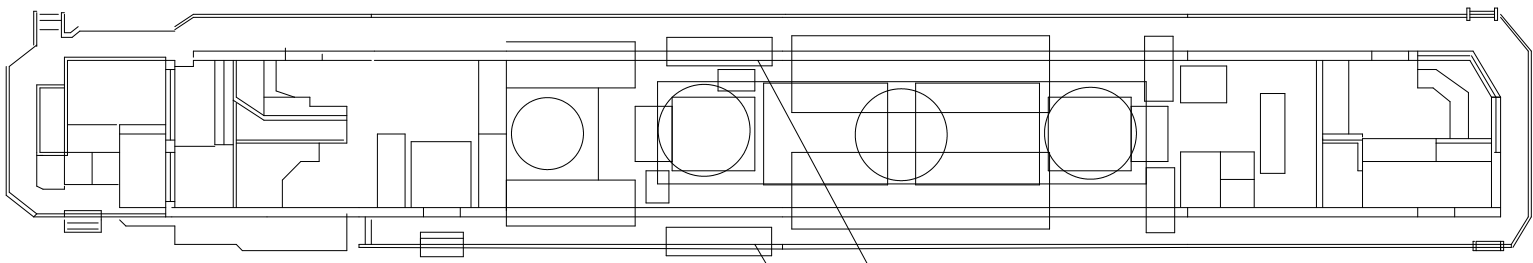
Generator Exciter, Auxiliary Assembly (Sheet 2 of 2).
